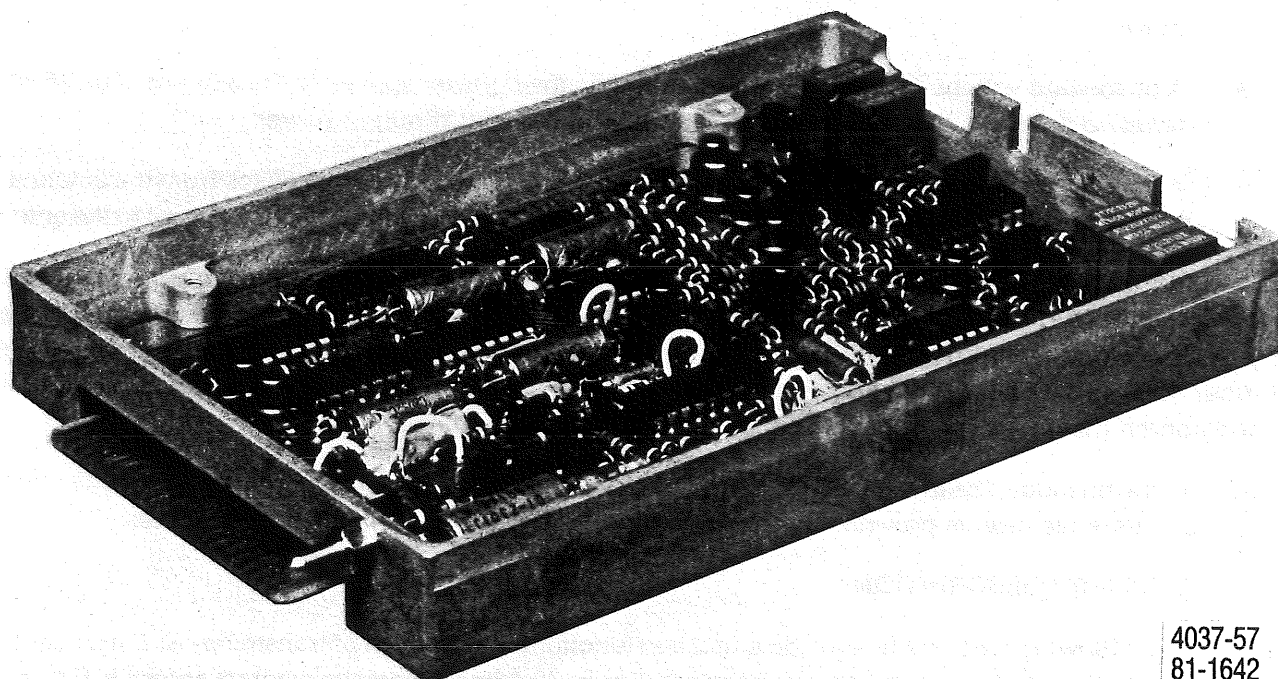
Receiver Circuit Card 1A5A2 Parts Location (Sheet 2 of 2)
